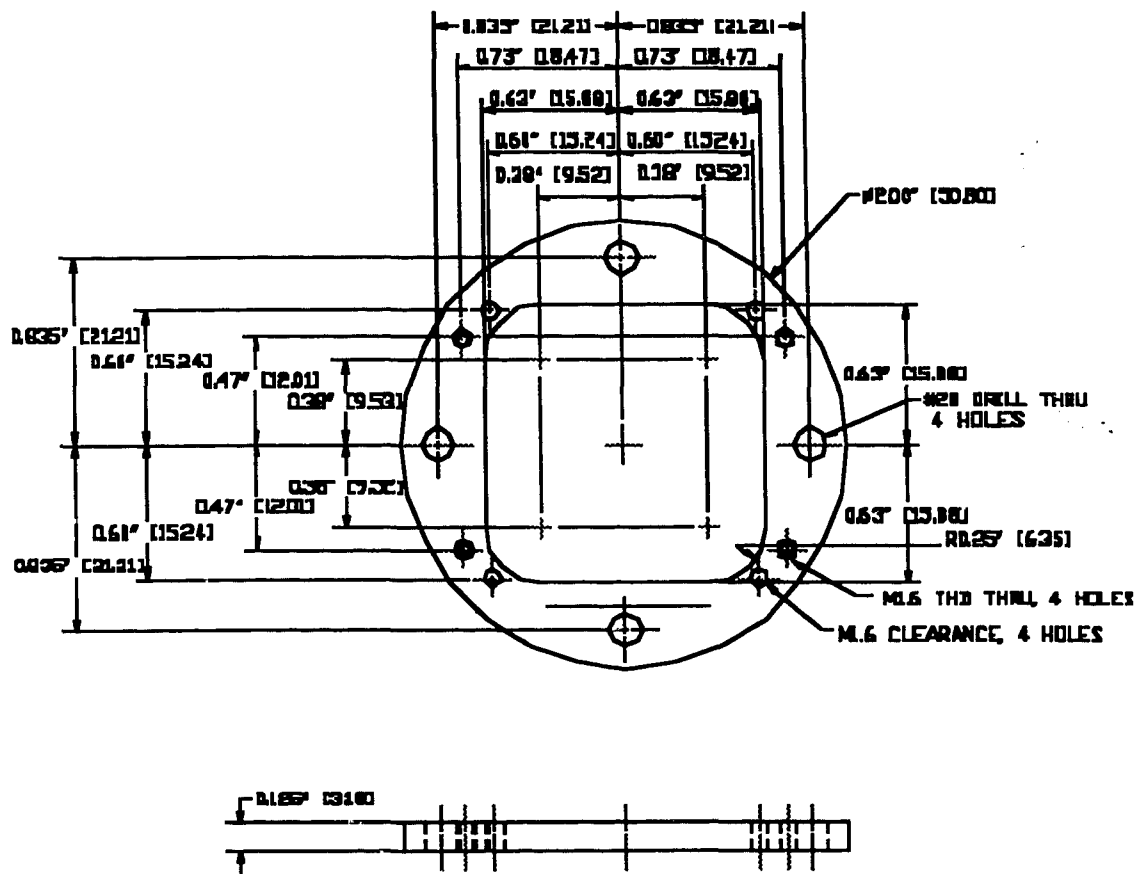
Ring piece used in the VCSEL-MSM system used for sandwiching the board for rigidity, and for guiding and locating the multiple actuator screws in the assembly.
